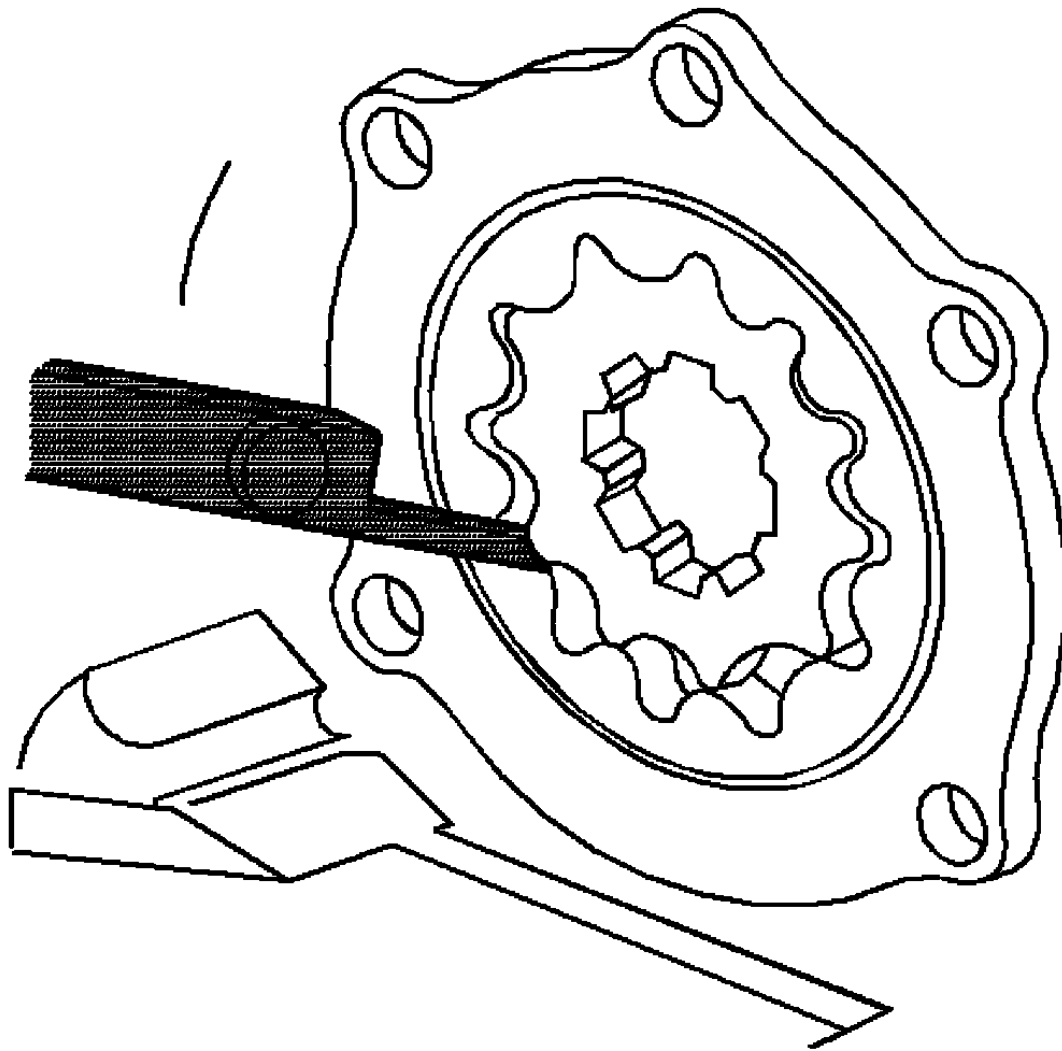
Measuring Inner Oil Pump Gear Tip Clearance
